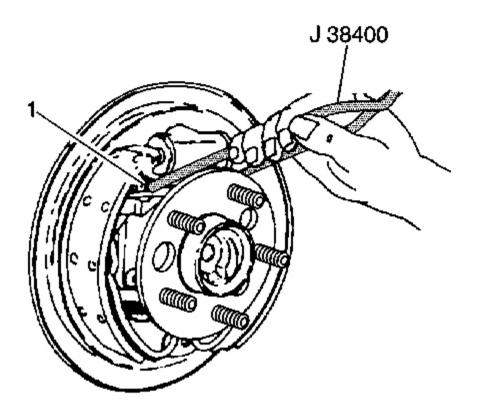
Using J 38400 Courtesy of GENERAL MOTORS CORP.
